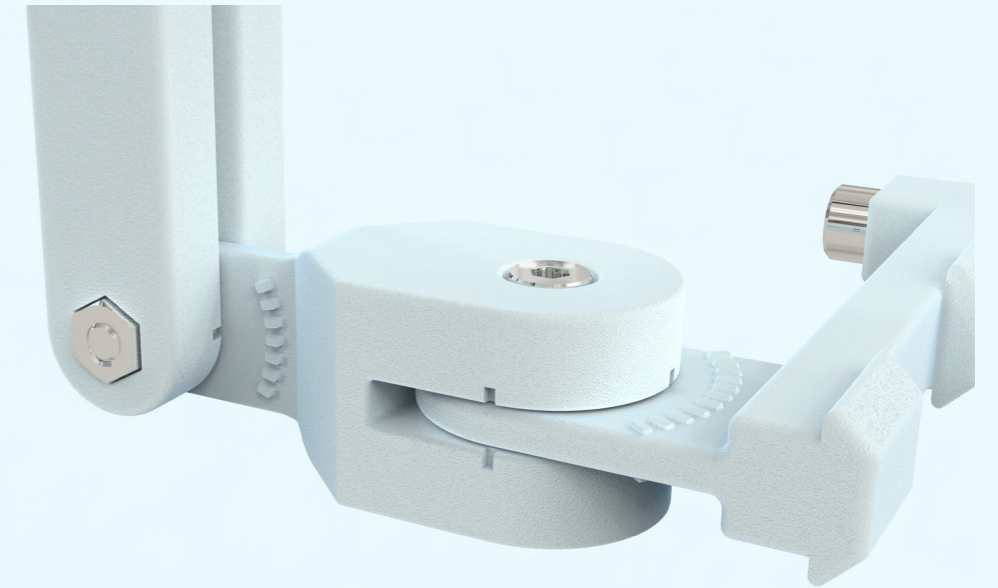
A close up of the extruded ridges on the 3D printed parts of the camera mount.
